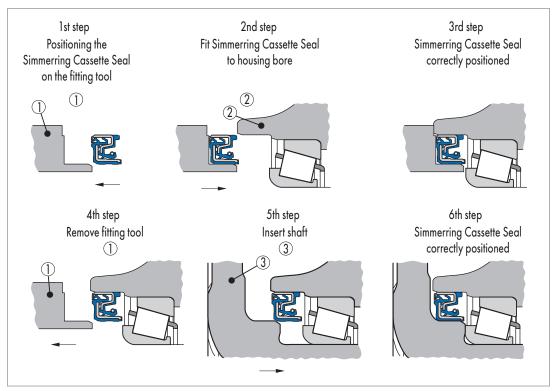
Fitting of Simmerring Cassette Seal – Case B (without "bearing stop")
